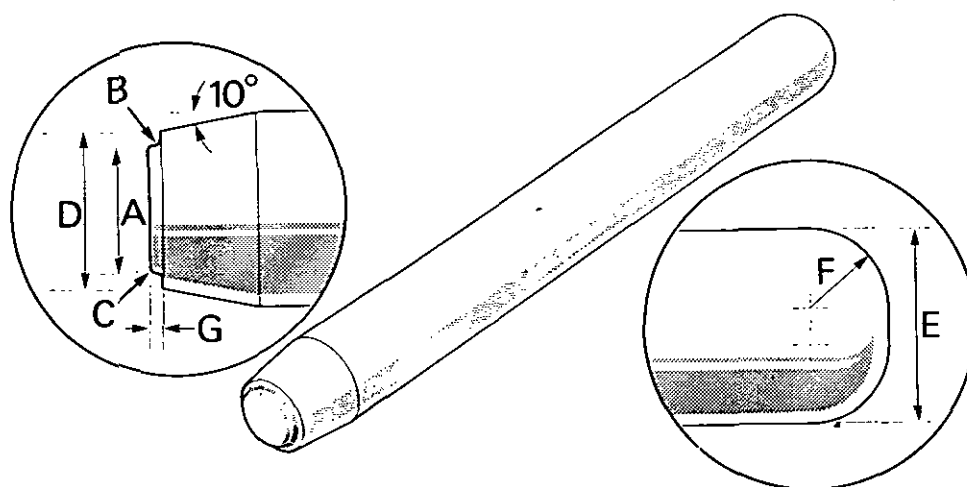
INSERT SWAGING TOOL — BORG AND BECK
